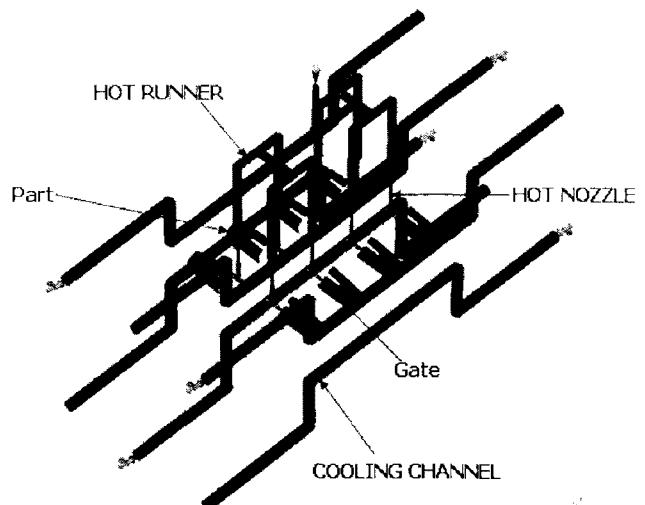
Result of injection mold design with part thickness of 500 μm and 8cavity layout
